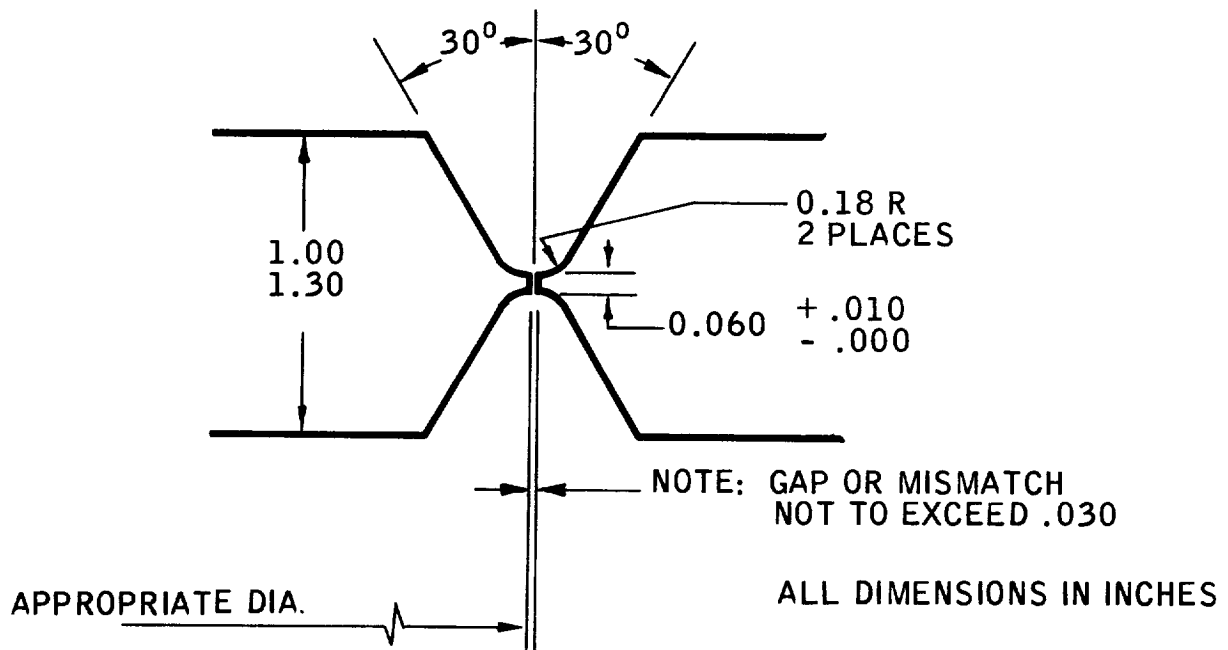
Typical Double U-Groove Utilized in Nozzle Jacket Welds
